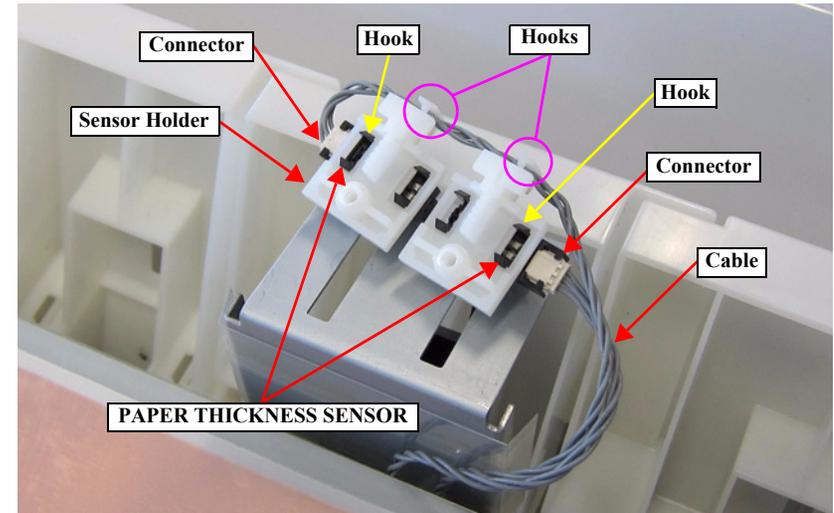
Removing the PAPER THICKNESS SENSOR
